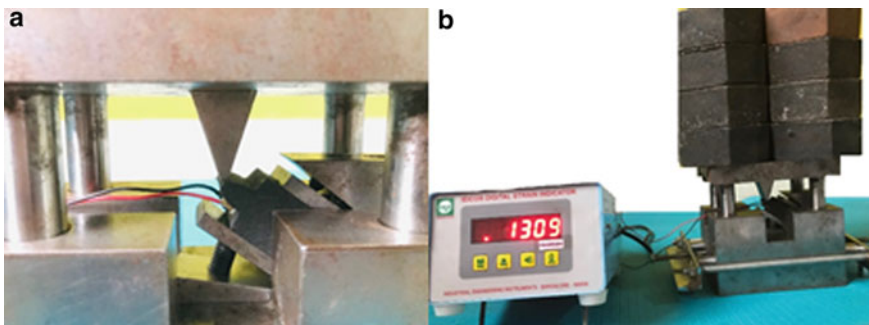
a Gear tooth bending fixture (GTBF). b Experimental setup
